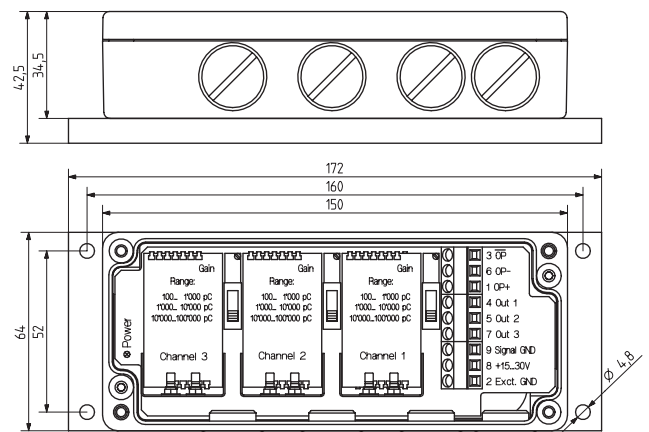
Dimensions of industrial charge amplifier Type 5038A...
